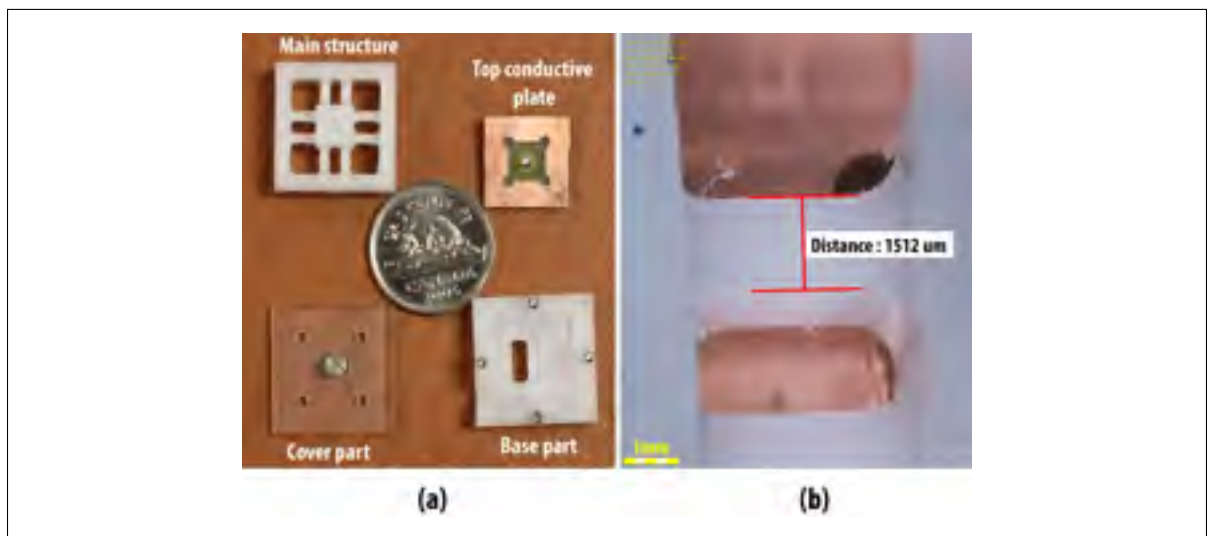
Triaxial force sensor parts: (a) mechanical parts before assembly, (b) beam feature after milling
